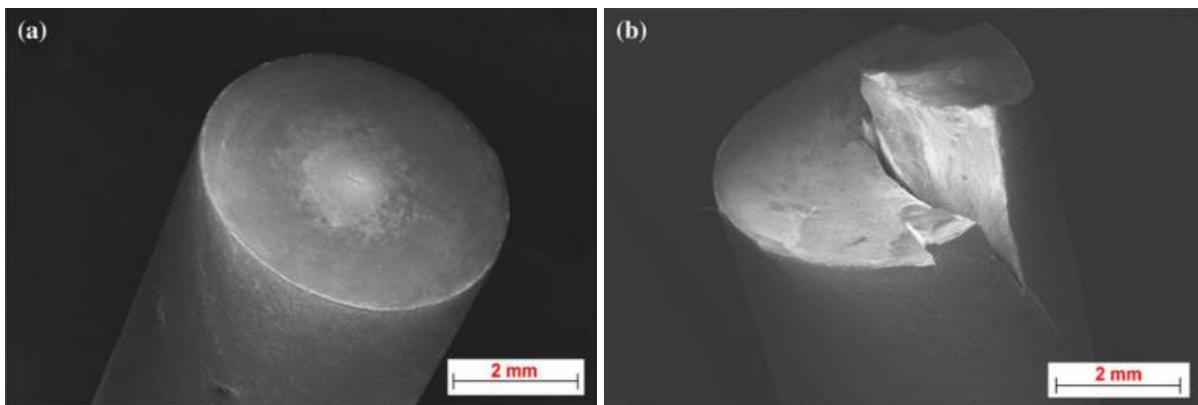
Torsion fracture of steel wire a) Flat fracture; b) Cleavage fracture [143]
